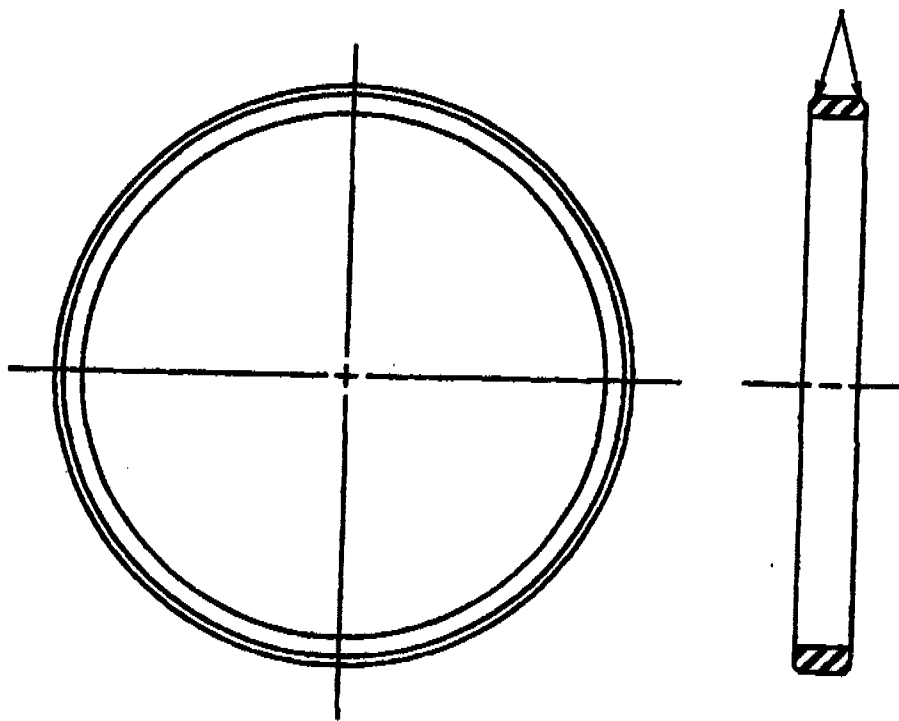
Final Machining Dimensions (1-190-050-06/07).
